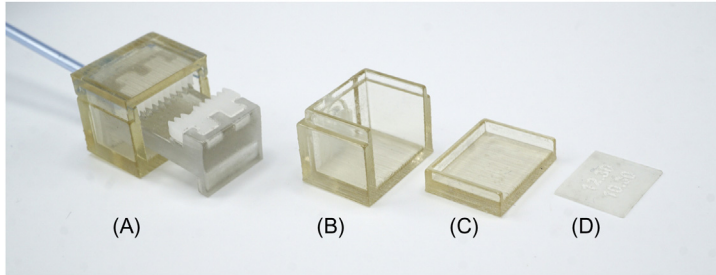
Realization of single-acting cylinder. (A) Assembled cylinder with piston, (B) housing, (C) cap, (D) seal.
